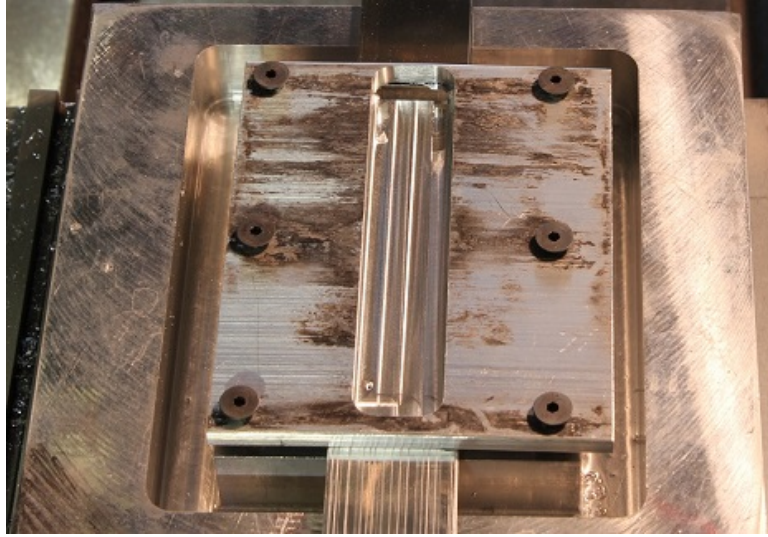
Mounted sample after machining out from the bottom. The sample is cut leaving a thin membrane around the dog-bone that is easily peeled away after the sample is removed from the fixture.
